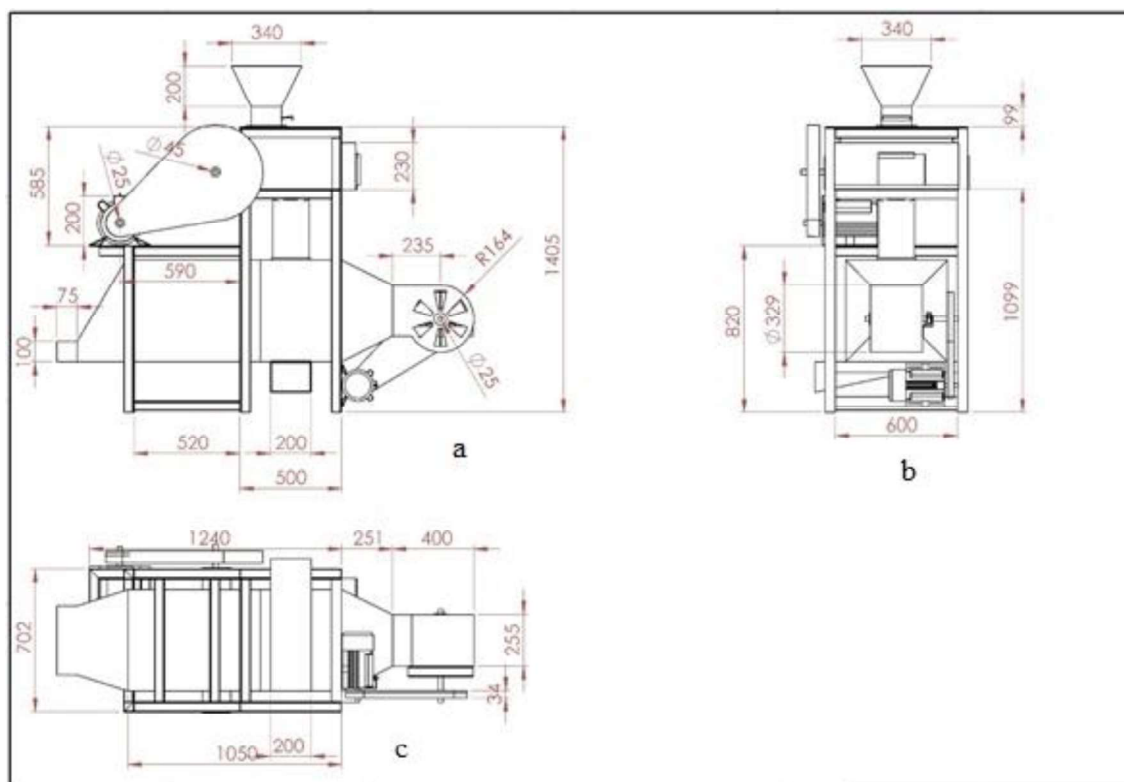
Orthographic views for side elevation (a), front elevation (b), and plan elevation (c)
